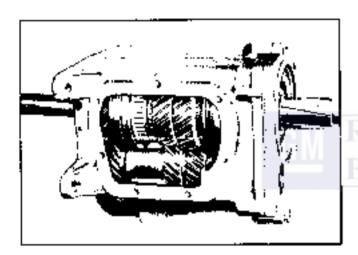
3rd and 4th Speed Synchronizer Sleeve in 4th Geor Position
